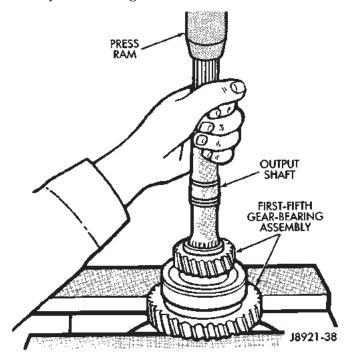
Remove Fifth Gear, First Gear Bearing, And Thrust Washer
